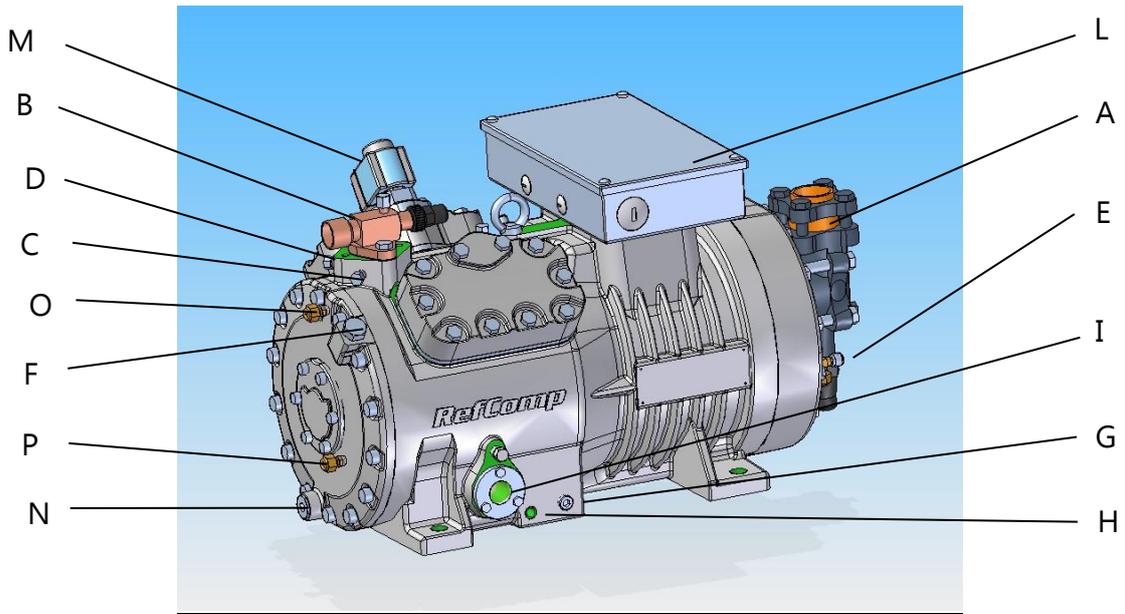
Model PP4-L/HFxx (forced lubrication)
